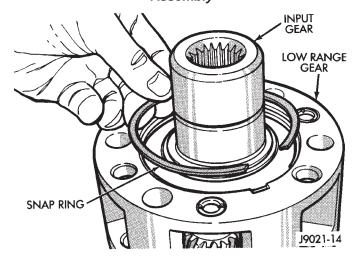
Removing Low Range Gear Snap Ring TRANSFER CASE CLEANING AND INSPECTION
